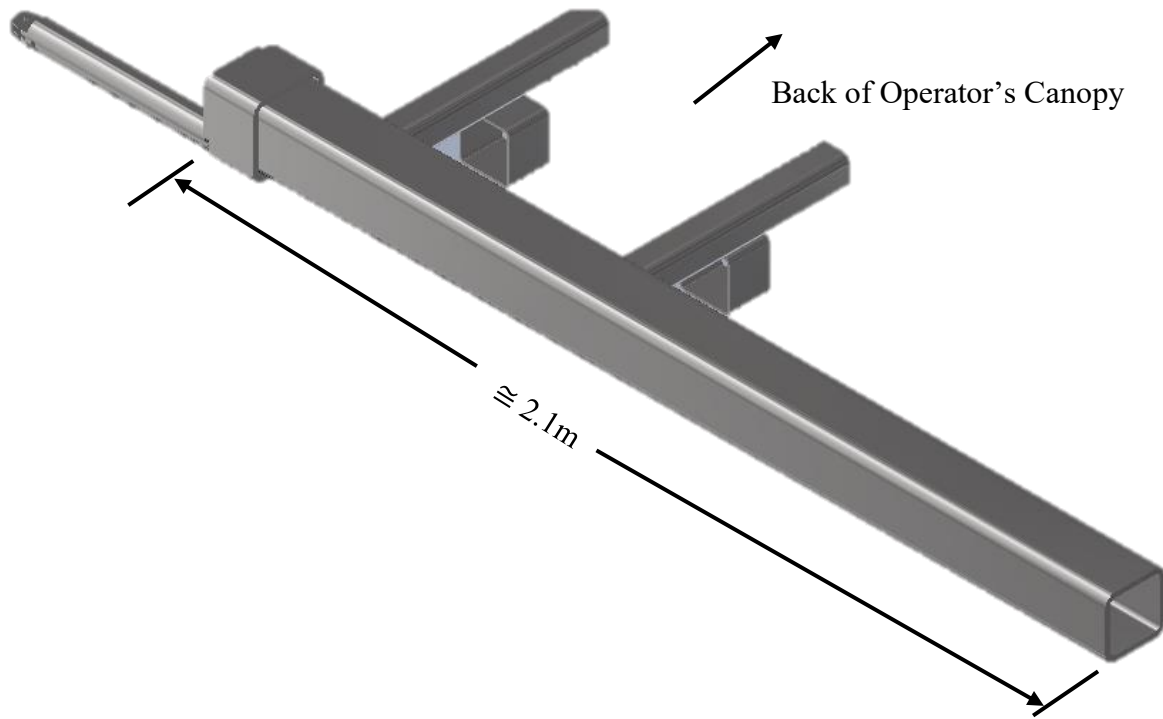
The designed borer mount. The system would be attached to the borer on the top right-hand corner of the image and the drilling apparatus on the slide located on the top left. The slide is moved back and forth by a single telescopic hydraulic cylinder in the top left. There is also an extension on the bottom right corner that is removable for entering a first pass room.
